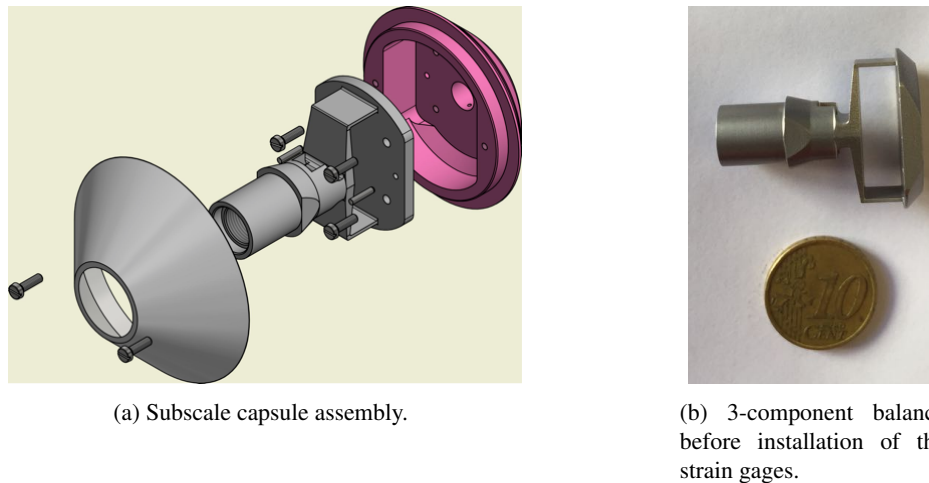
Left: CAD drawing of the assembly of the ablative capsule composed by the interface, the balance and the back cover (ablative heat shield is not shown); Right: 3-component balance after manufacturing.
